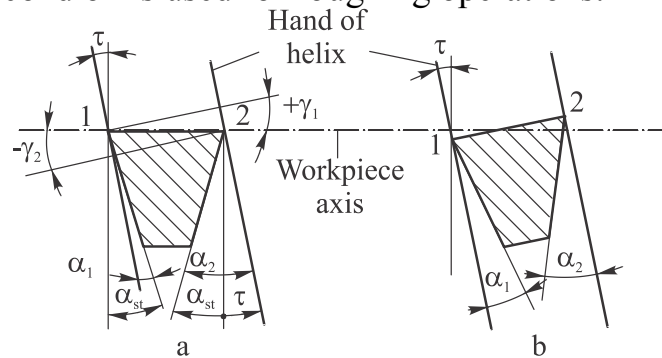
Radial thread cutter setup for high-helix threads: (a) face is in axial plane; (b) with inclined face normal to the thread coils
